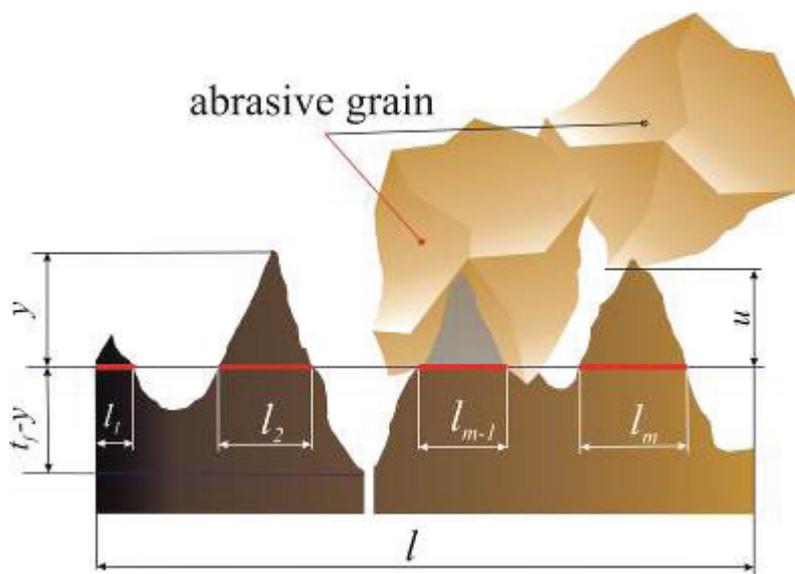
Scheme for calculating the probability of removing the surface layer when grinding the material
